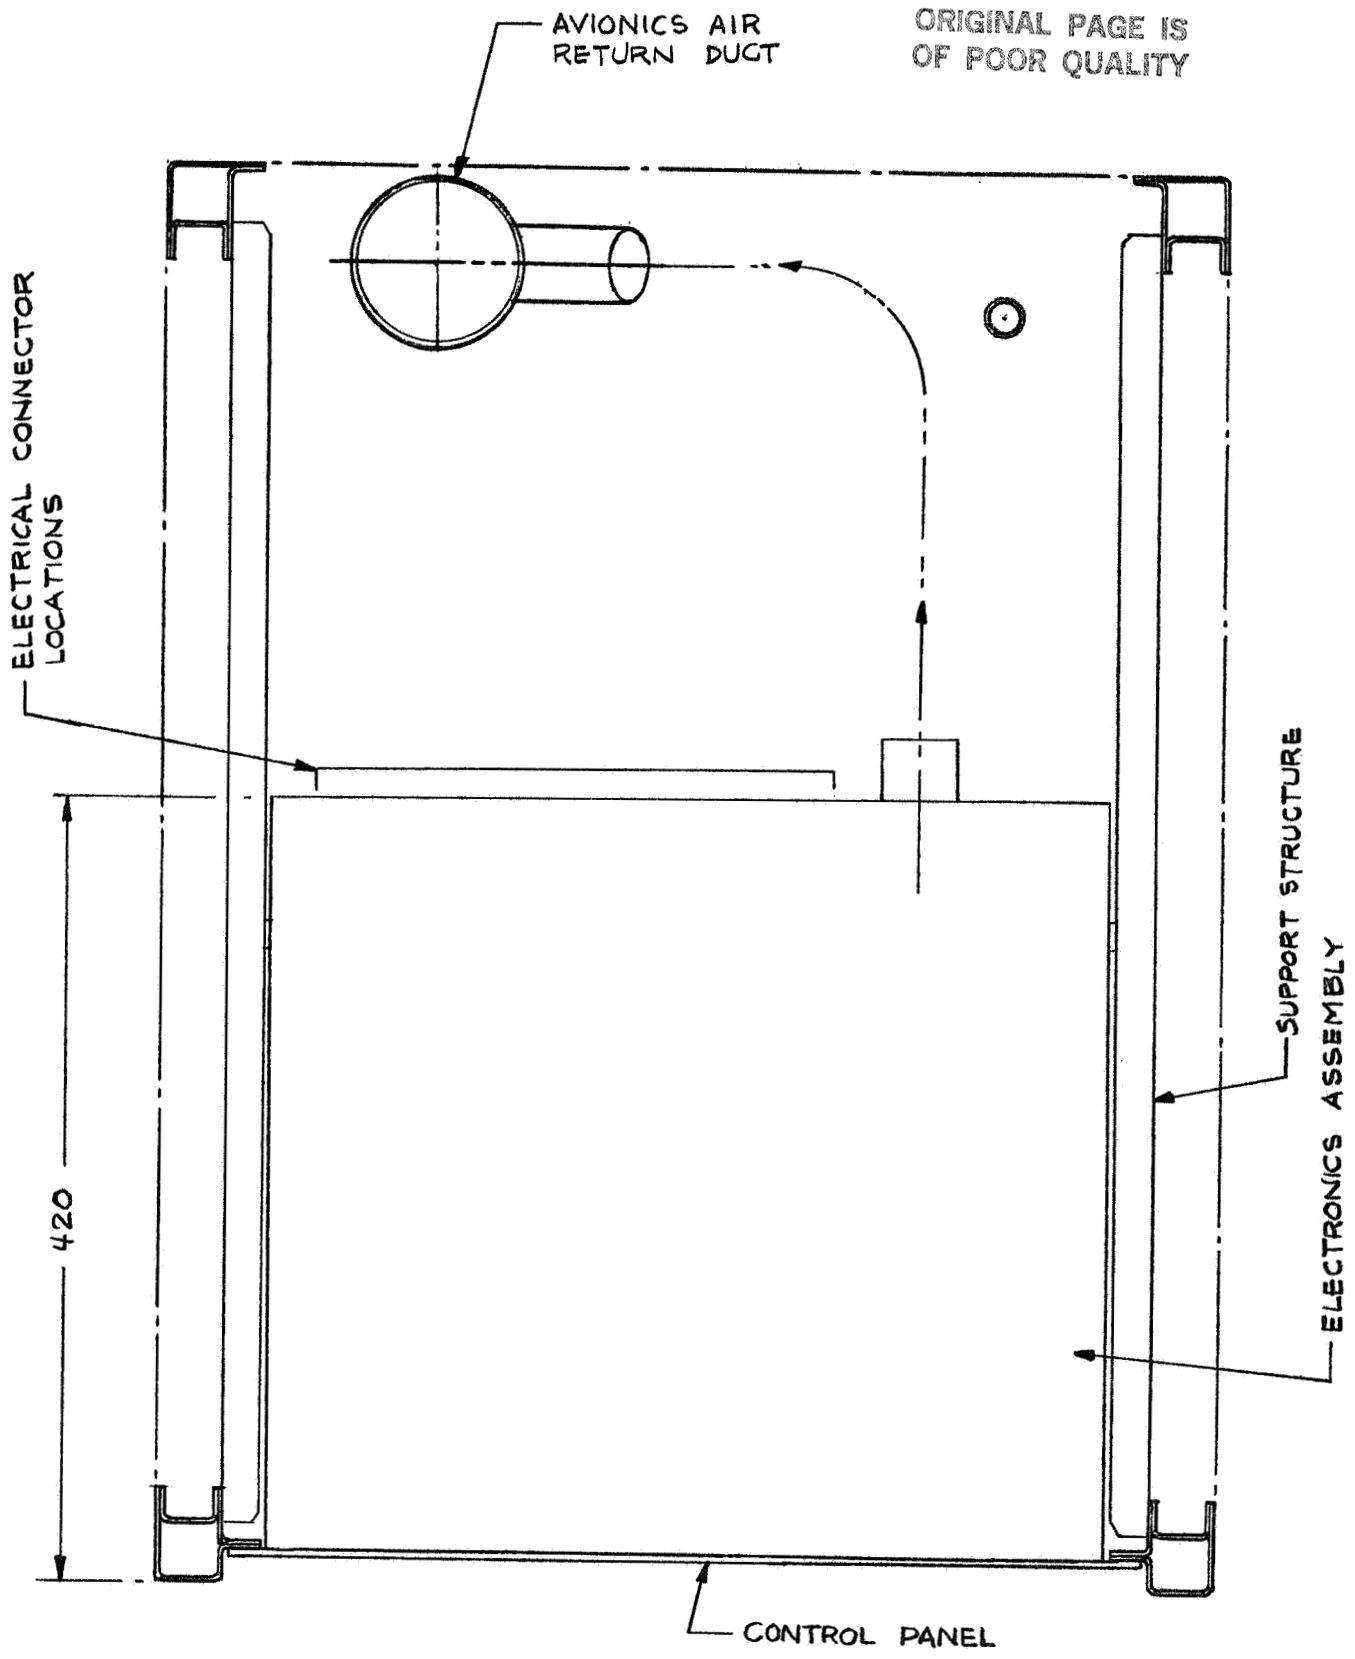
(d) SECTION C-C (ELECTRONICS ASSEMBLY INSTALLATION, DIMENSIONS IN MM)
